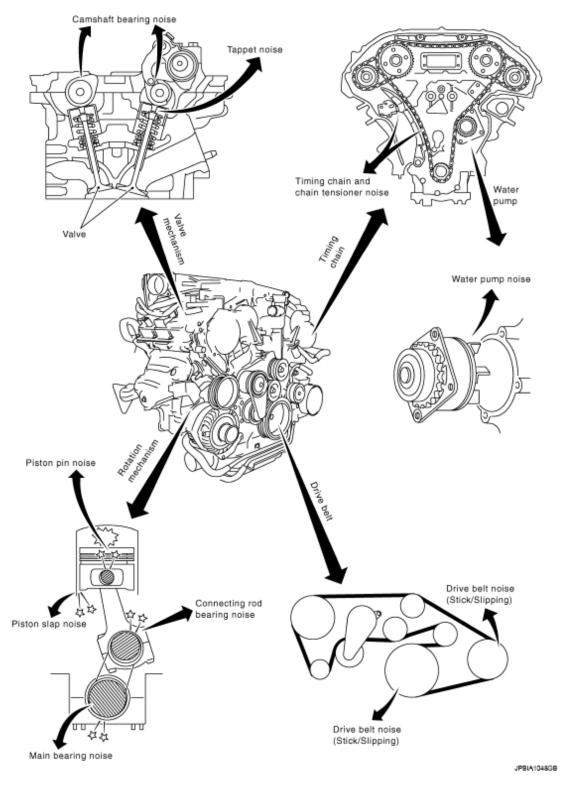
Locating Engine Noise Occuring Areas Courtesy of NISSAN MOTOR CO., U.S.A.
